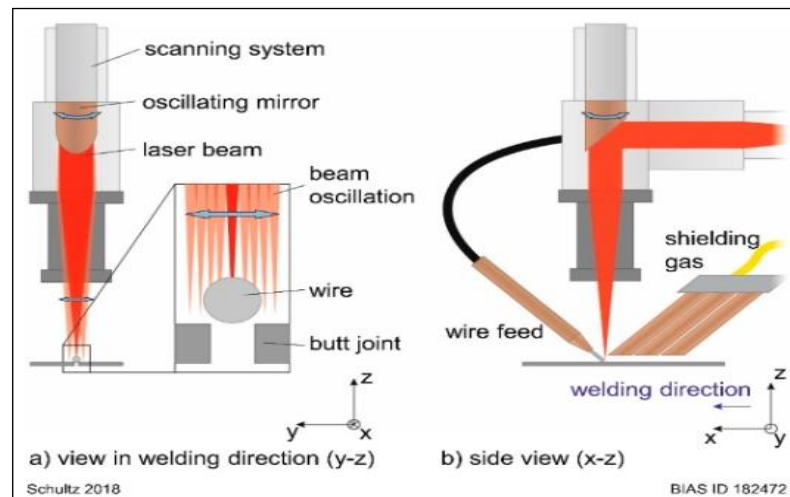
Schematic illustration of the welding process setup( Seefeld et al. 2019)
